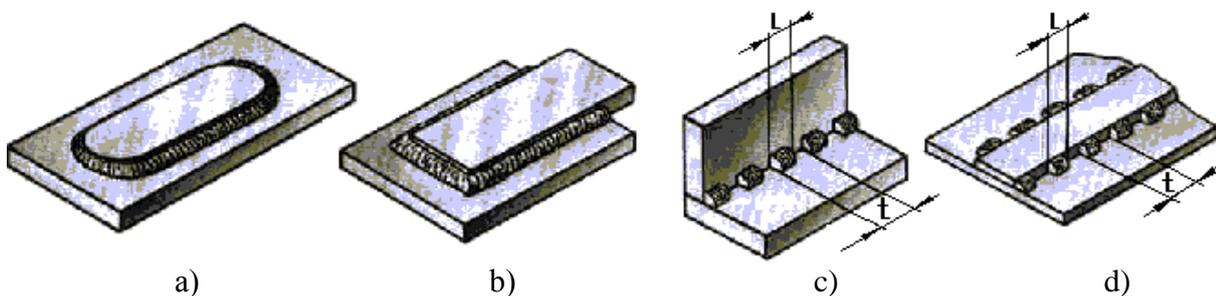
Uninterrupted and interrupted welds
